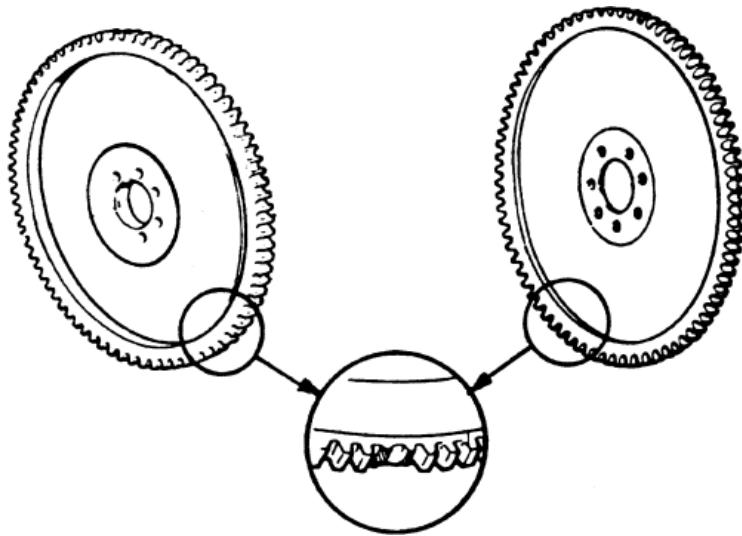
Check the ring gears teeth for damage; if damage is noted, replace the ring gear
